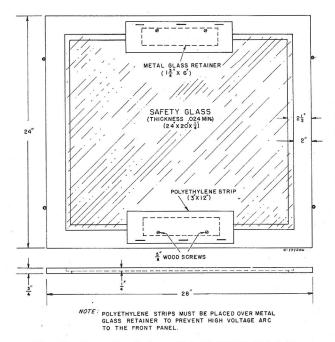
Front Panel Assembly—21AXP22 Tri-Color Kinescope Test Jig
